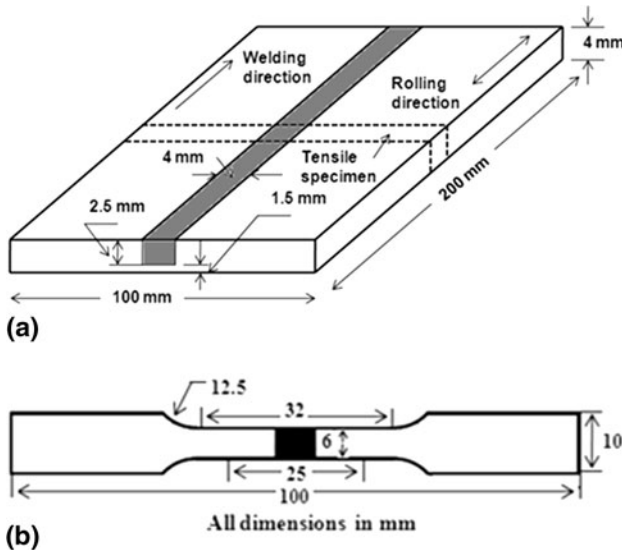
Schematic of the AA6061-AA4043 filler metal weld. (a) Showing region from where tensile specimens were obtained and (b) standard subsized ASTM E8M tensile specimen (25 mm gauge length)
